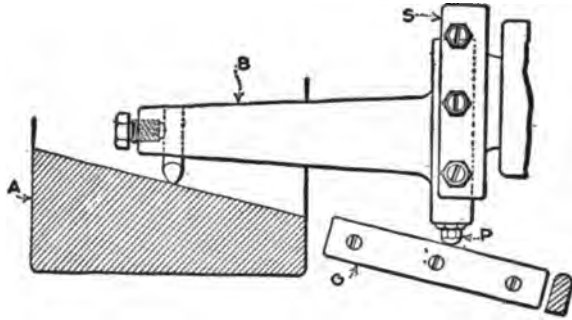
ARRANGEMENT FOR BORING TAPER HOLES
